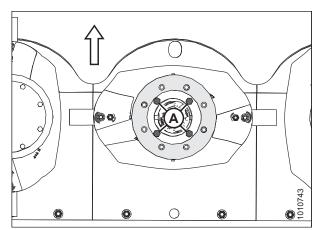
Drum Disc (Top View, Arrow Indicates Front of Machine)
